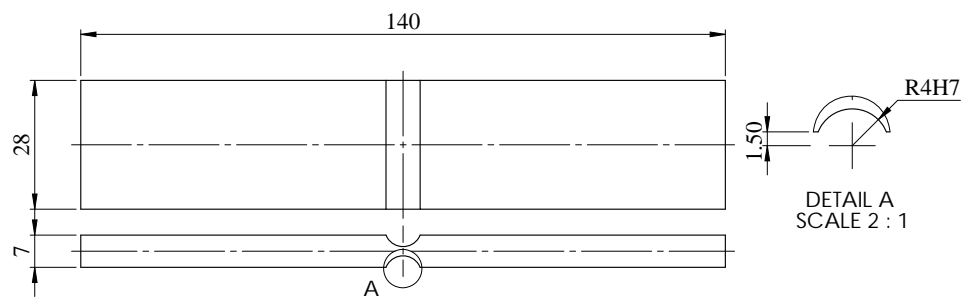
Flat grooved specimen of X60 piping steel (X60_FG).
